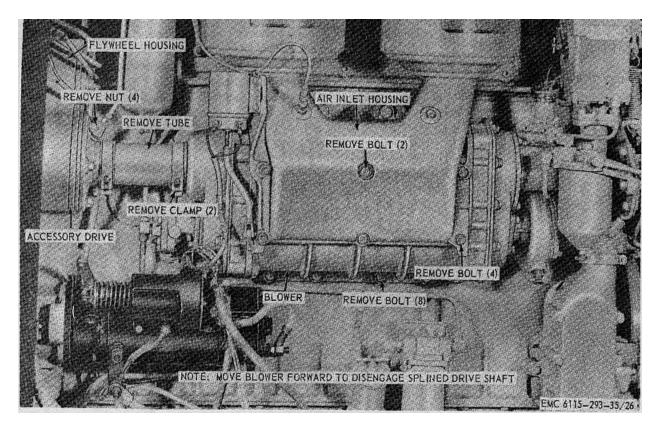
Air inlet housing, blower, and accessory drive, removal and installation.
